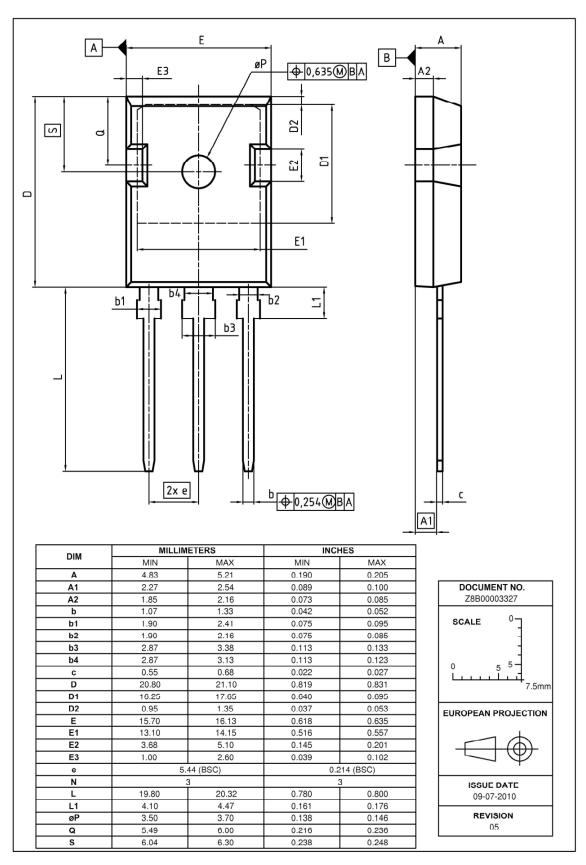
Outline PG-TO 247-3, dimensions in mm/inches
